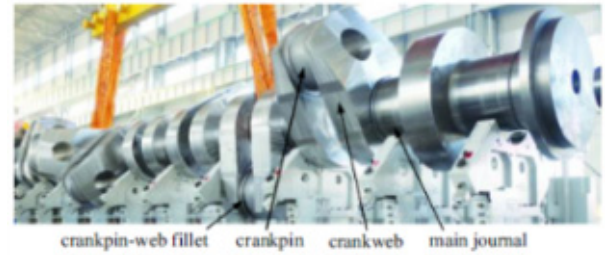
Example of built-up crank shaft of low-speed 2-stroke marine diesel engine
